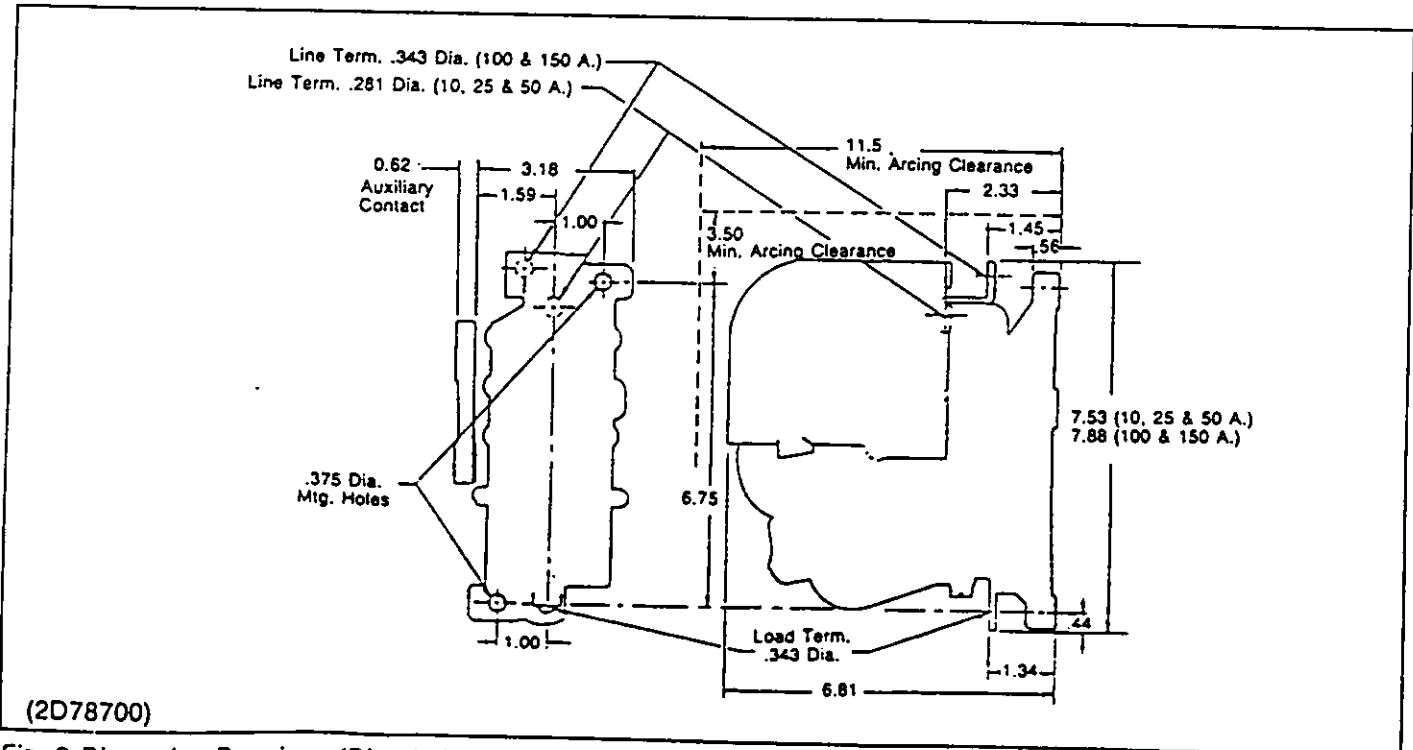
Dimension Drawings (Dim. in inches) of 1 NO Pole MME Contactor
